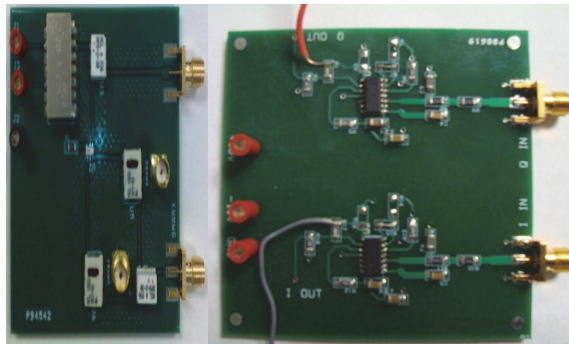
Second Generation PCB system for our sensor: RF PCB (left); Analog PCB (right)
